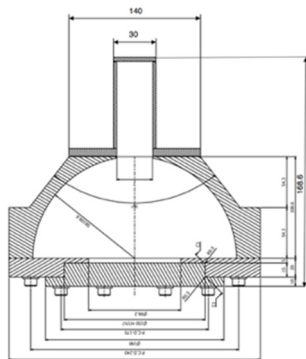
Cross-sectional drawing of mushroom-shaped Aluminum test cavity.
